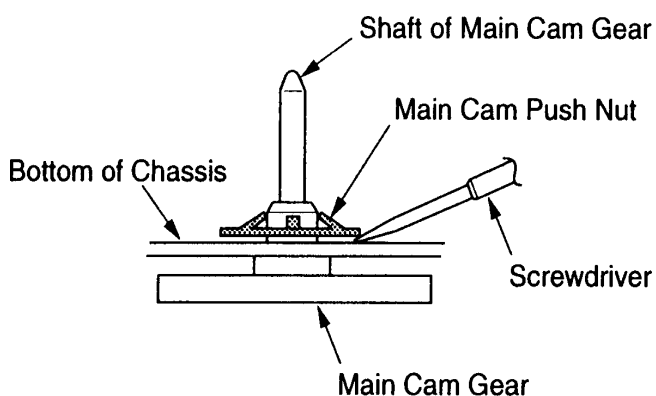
Main Cam Gear/Drive Rack Arm Removal
